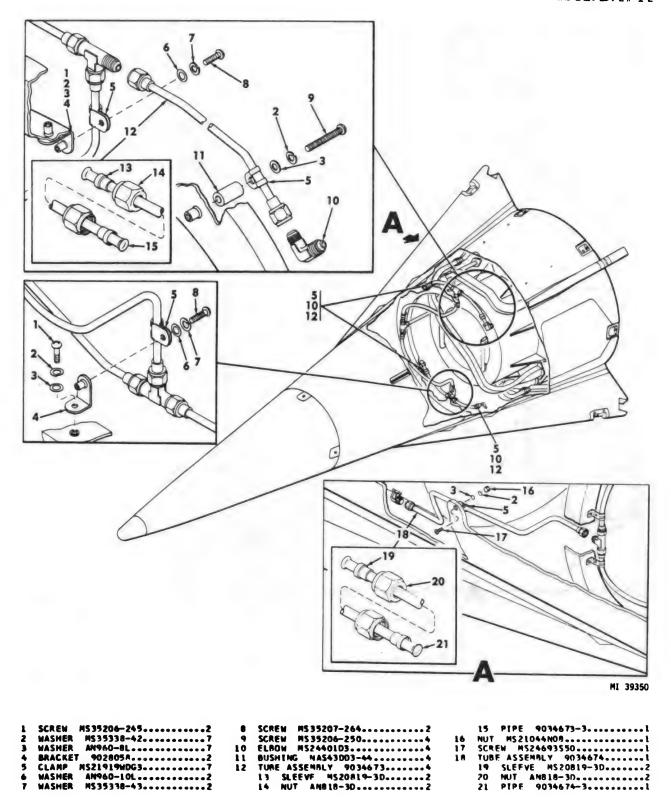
EQUIPMENT INSTALLATION. FORWARD BODY ASSEMBLY /9020575 AND 9979613/
